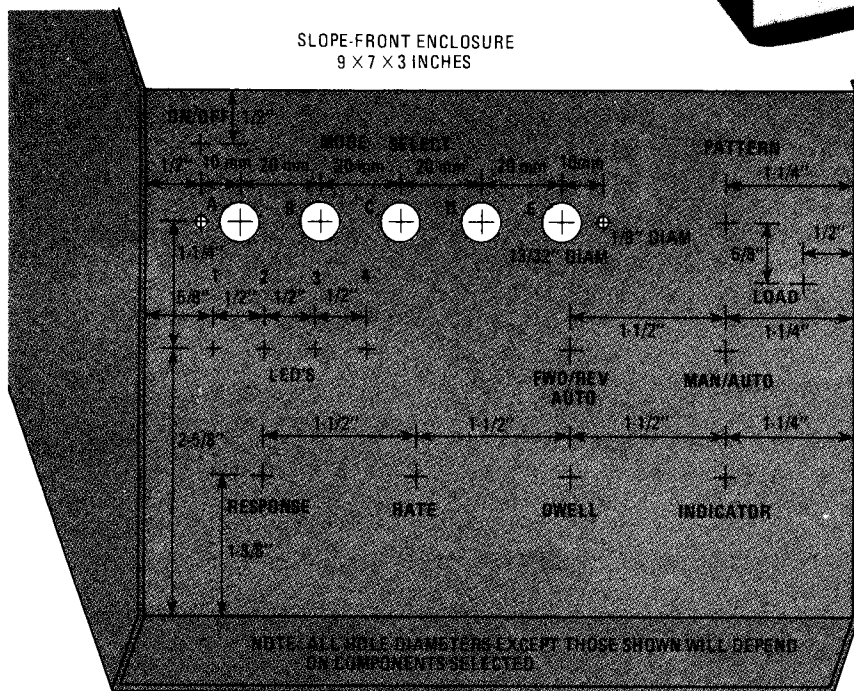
USE THIS as a drilling guide for the control unit's front-panel components.
